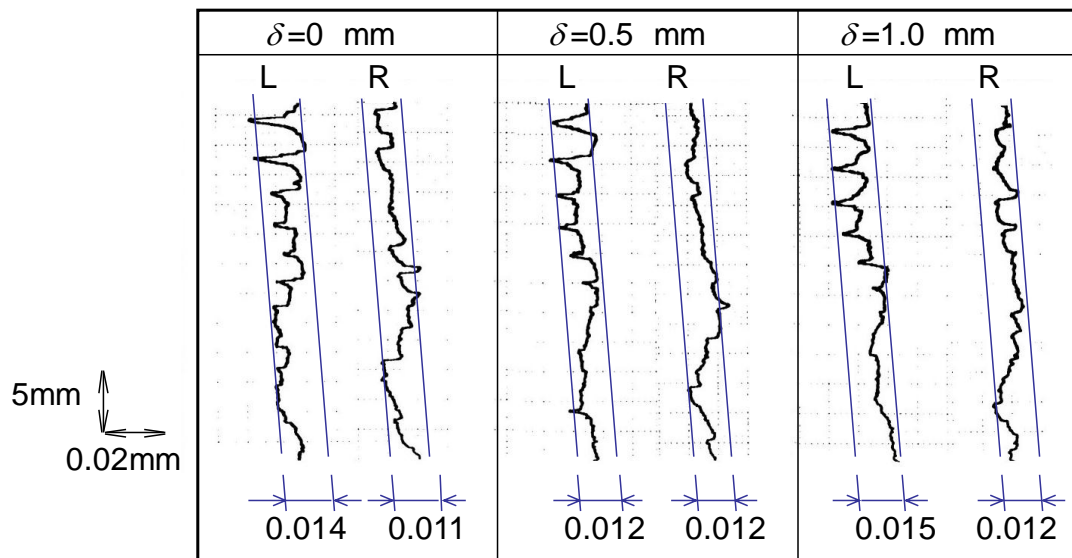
27 Improvement of the profile errors of machined surface by magnetic clamping.
